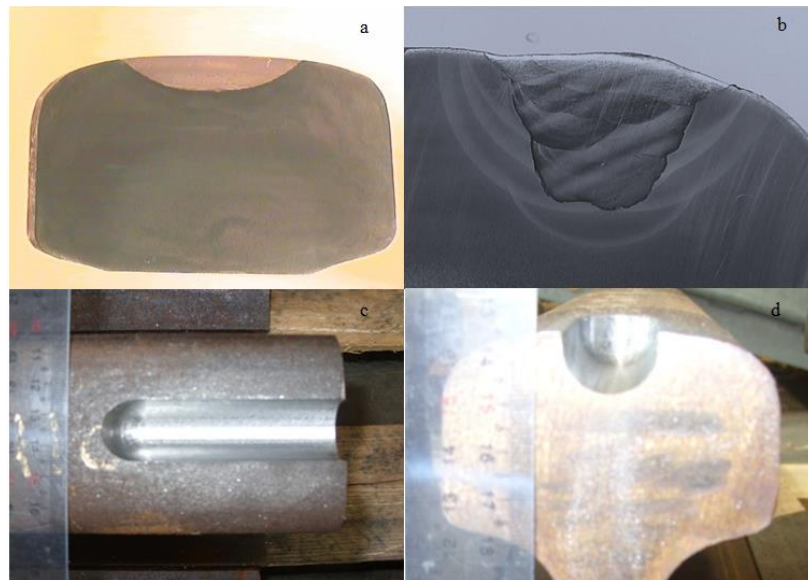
Different Weld profiles on the rail head surface; (a) profile for Martensitic stainless steel coating, (b) maraging steel weld deposit in a shallow groove, (c, d) redesigned bathtub groove on the rail head.
